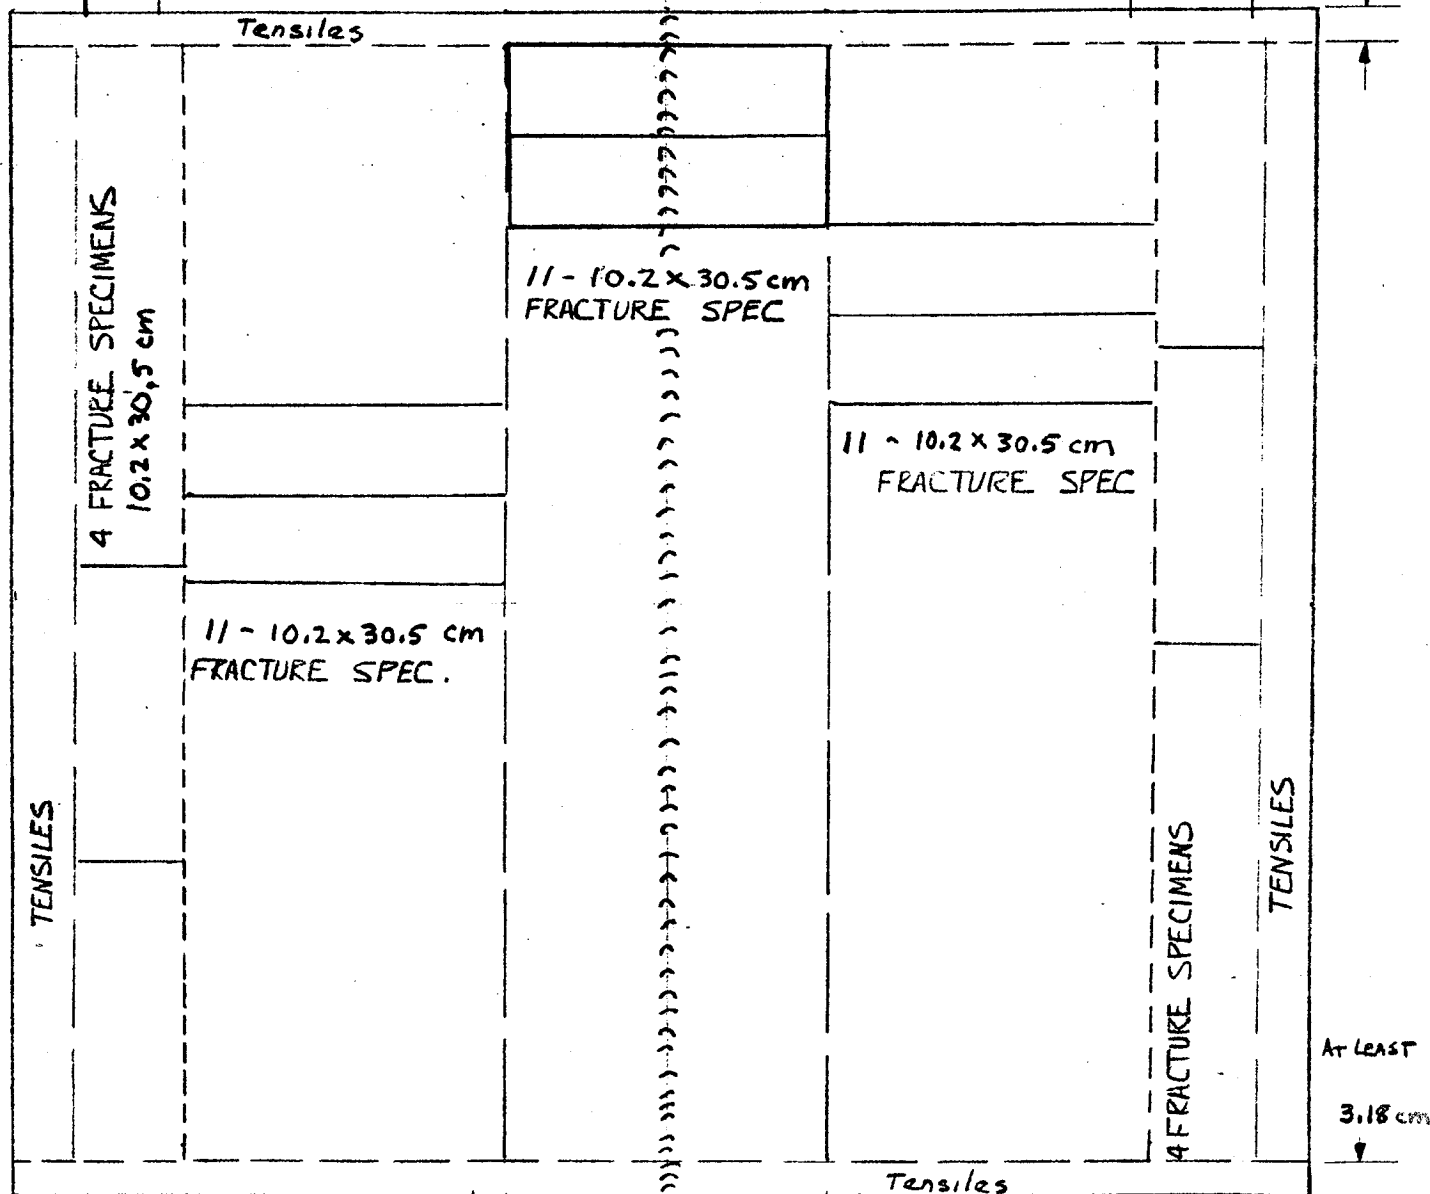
Layout of Tensile and Fracture Specimens for one sheet of 2219-T87 Aluminum Alloy
